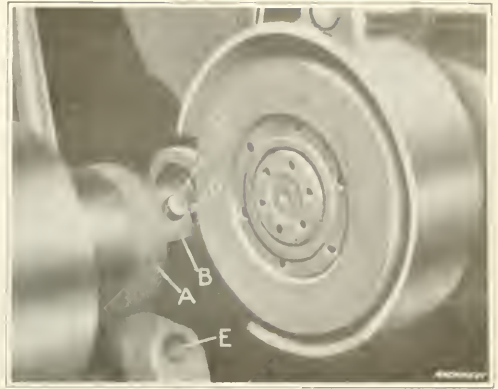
Simple Wheel Truing Device for Use on Bryant Two-spindle Chucking Grinder
